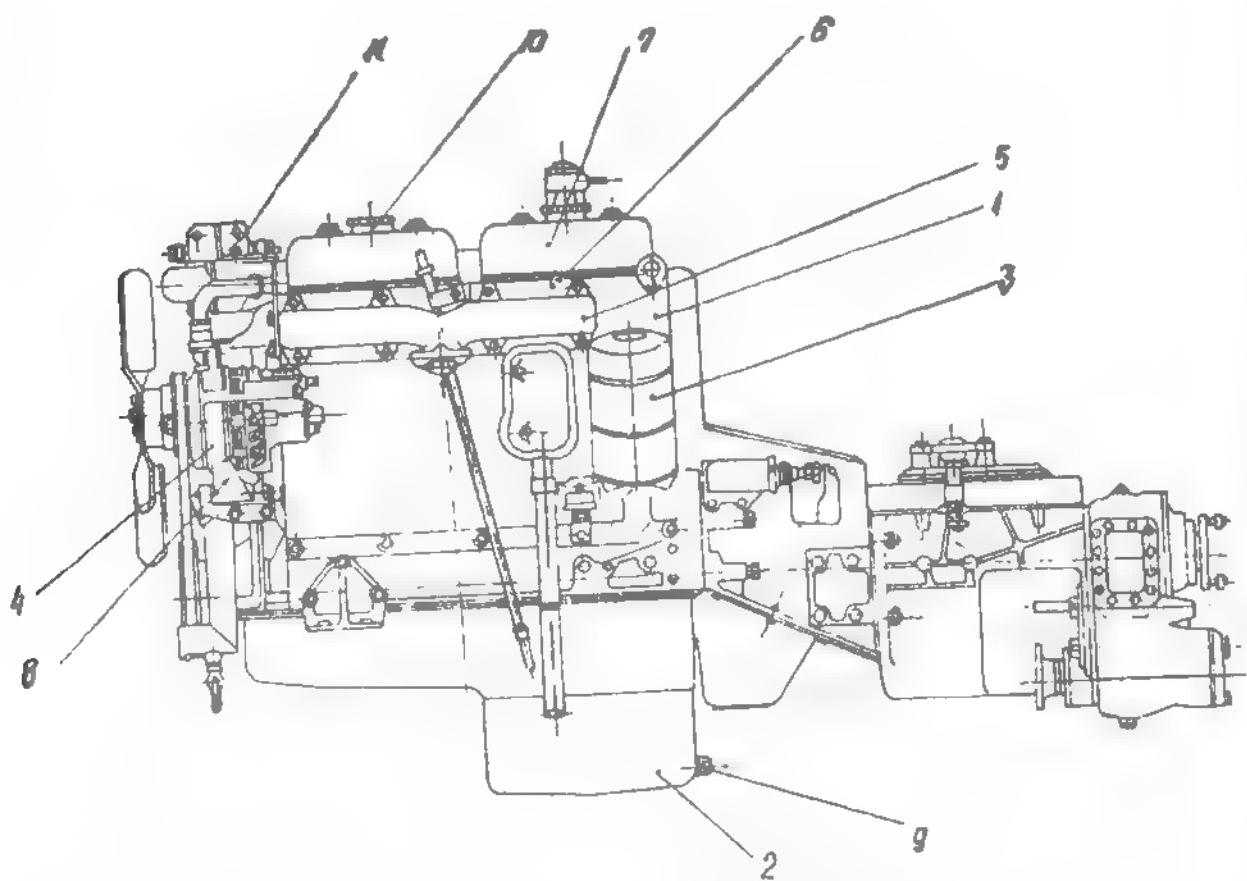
ARO D-127 DIESEL ENGINE SIDE VIEW
